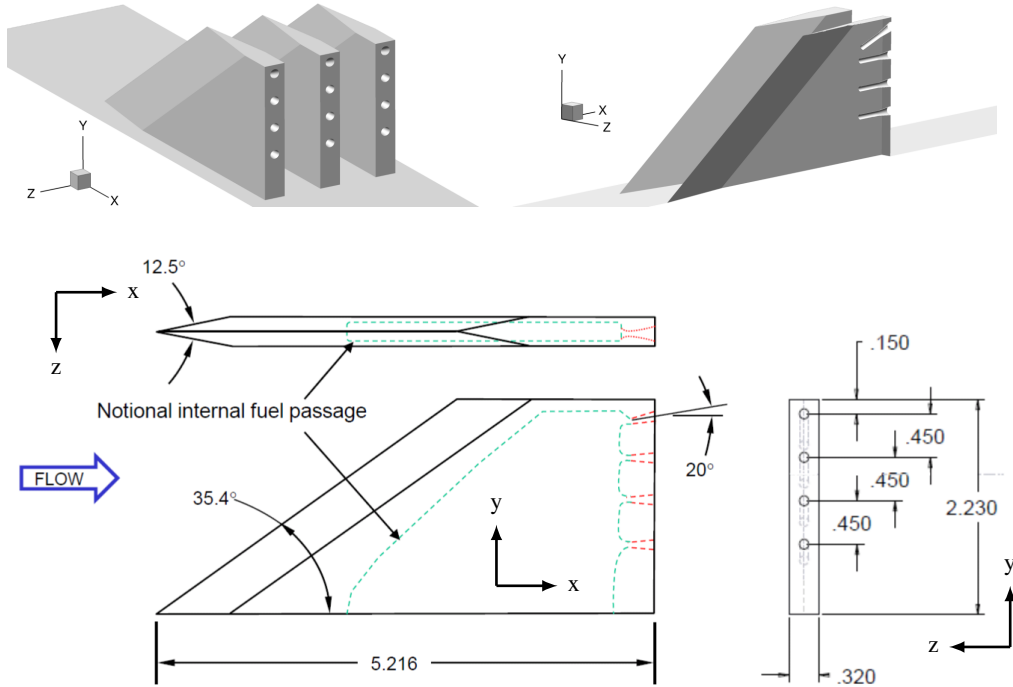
Isometric views and dimensional details of the baseline strut injector (dimensions are in inches).
